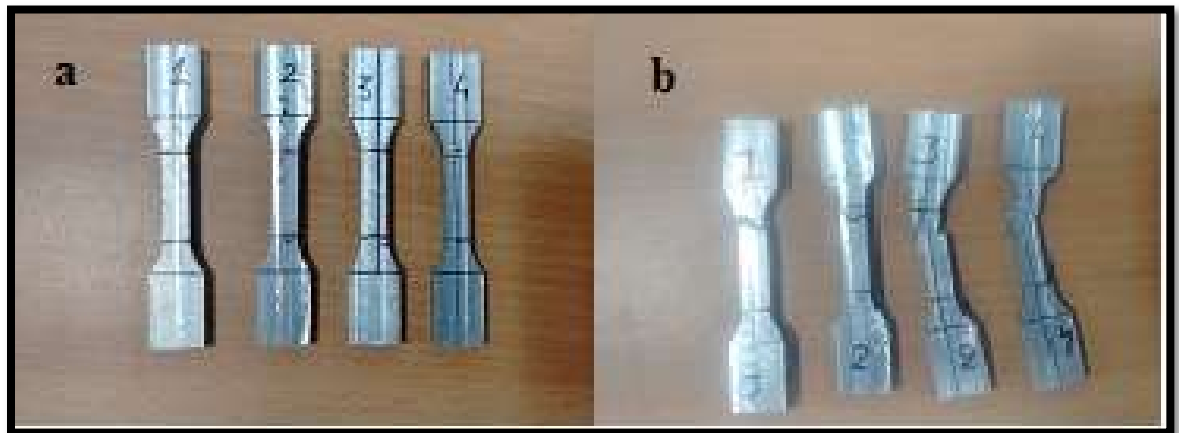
Tensile specimen a) Before Testing b) After Testing
